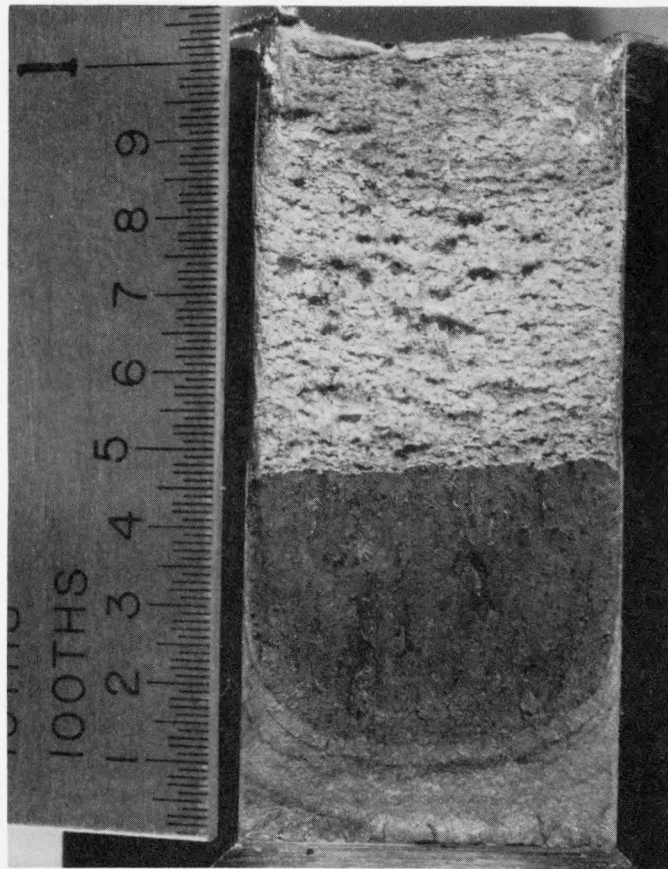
Fracture surface of deeply side grooved 1T compact tension specimen 54H tested in 50 psig H_2S . The constant displacement test was terminated prior to crack arrest in order to assess the crack front configuration. There is no evidence of plane stress pinning on the sides of the crack front.
